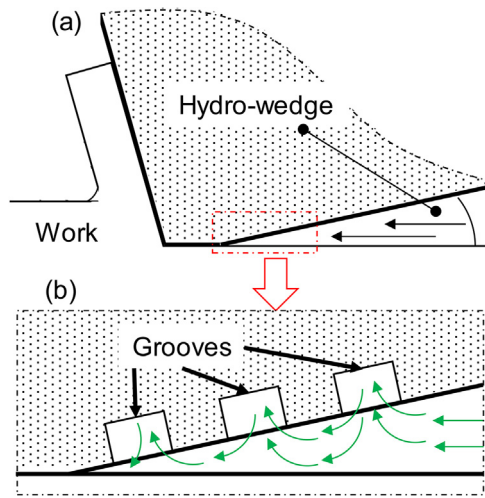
Micro-texture at flank face. (a) Non-patterned tool. (b) Micro-textured tool.
